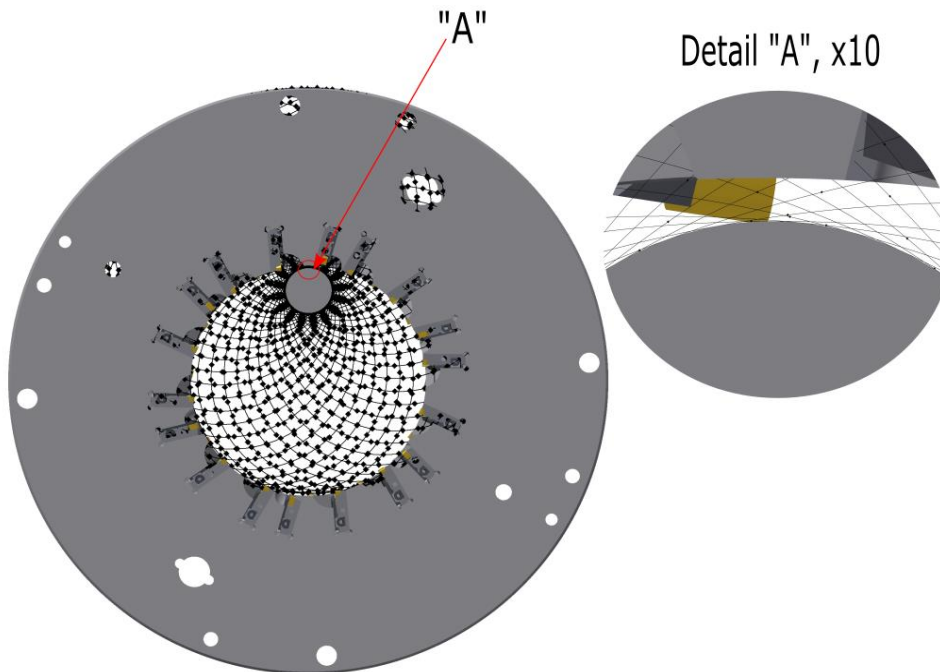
Trajectory of motion of a selected point of the edge of the cutting insert during shaping of the surface of machined crankpin
